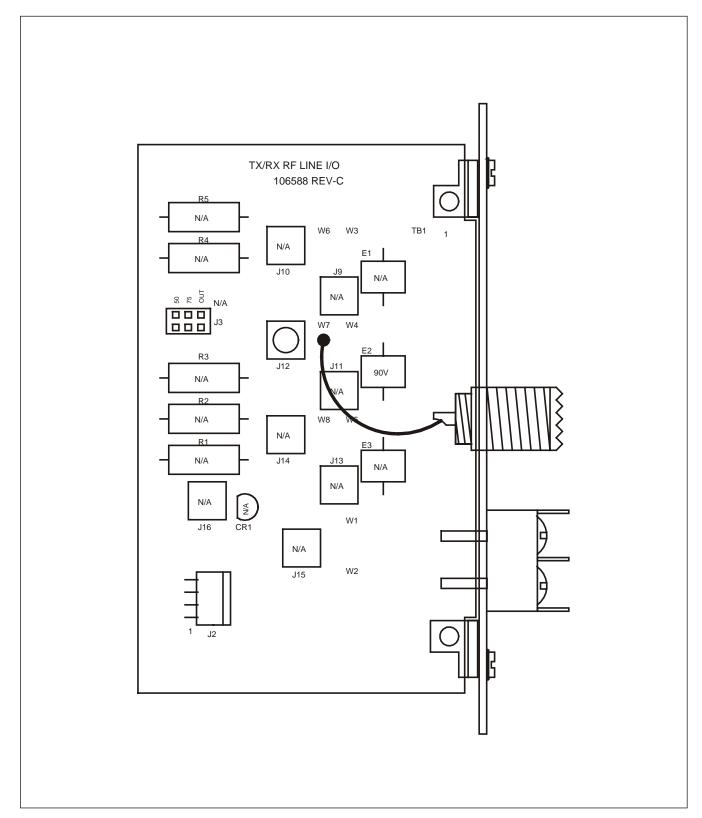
Component locator drawing, TX/RX RF Line I/O module (106585-2)
